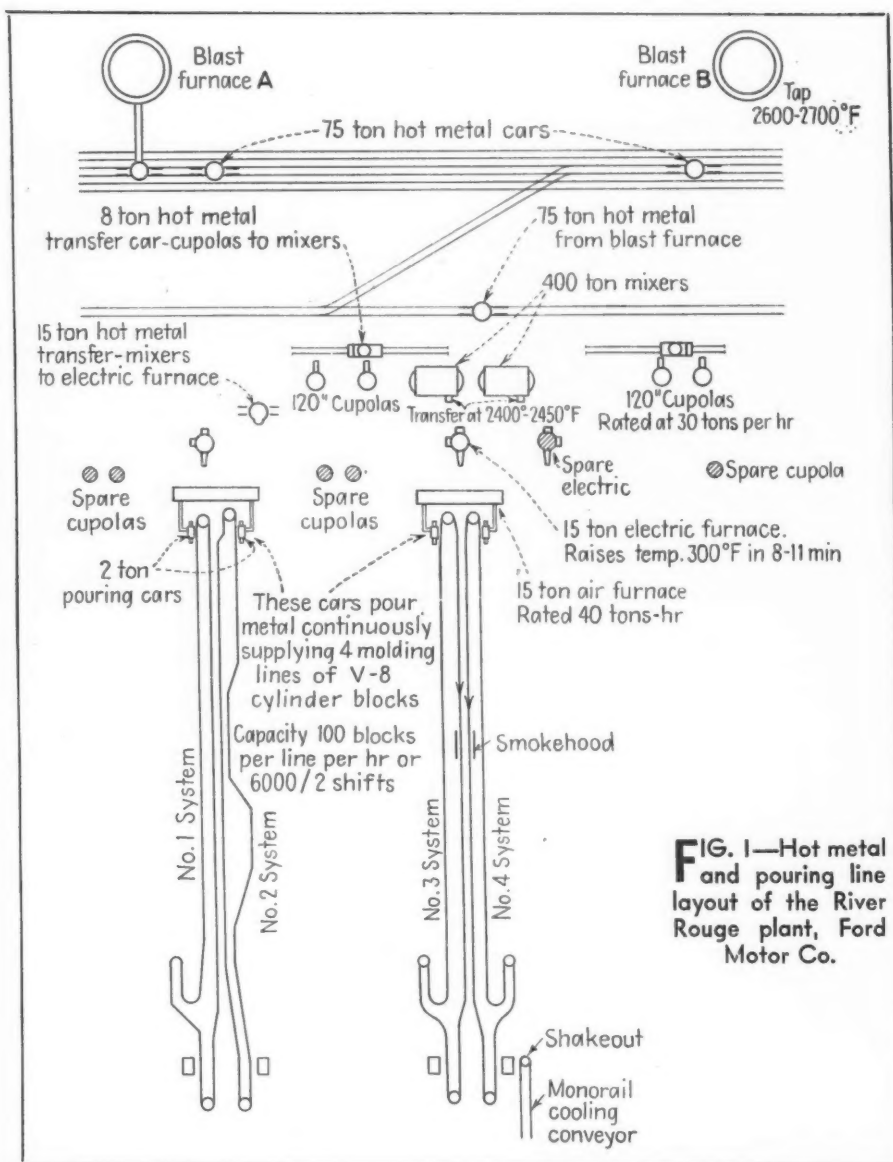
Hot metal and pouring line layout of the River Rouge plant, Ford Motor Co.
